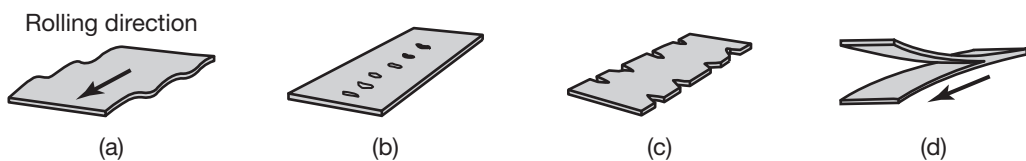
Schematic illustration of some defects in flat rolling: (a) wavy edges; (b) zipper cracks in the center of strip; (c) edge cracks; (d) alligatoring.
